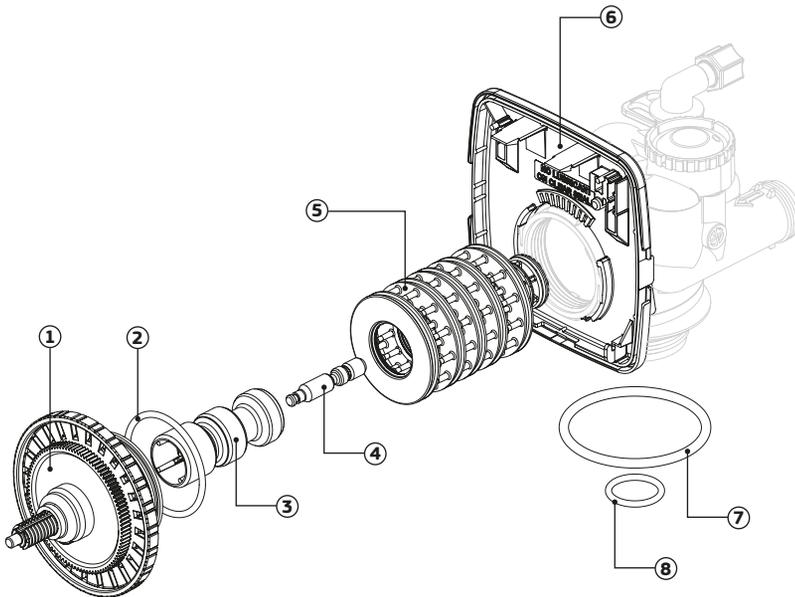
Drive Cap Assembly, Pistons and Spacer Stack Assembly
